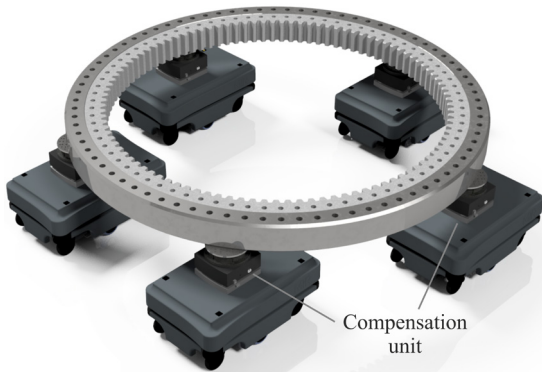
5 Mobile Industrial Robots (MiR) 200 carrying a crane bearing
